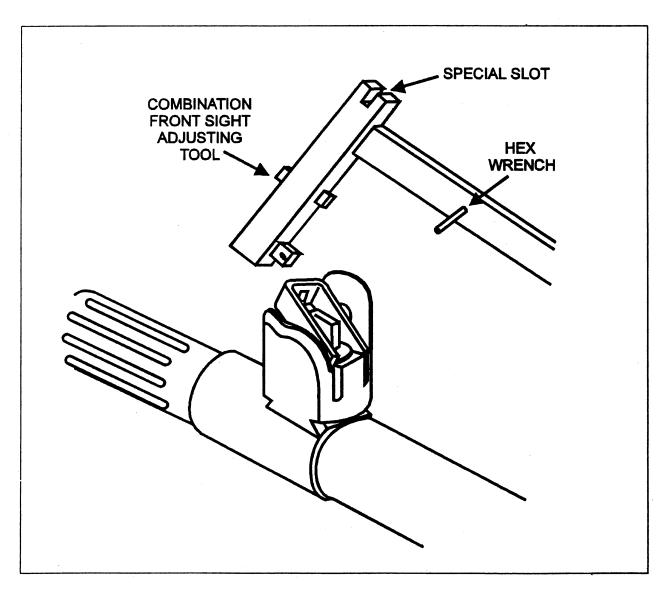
View of the combination front sight adjusting tool unlocking the front sight blade retaining strap.
